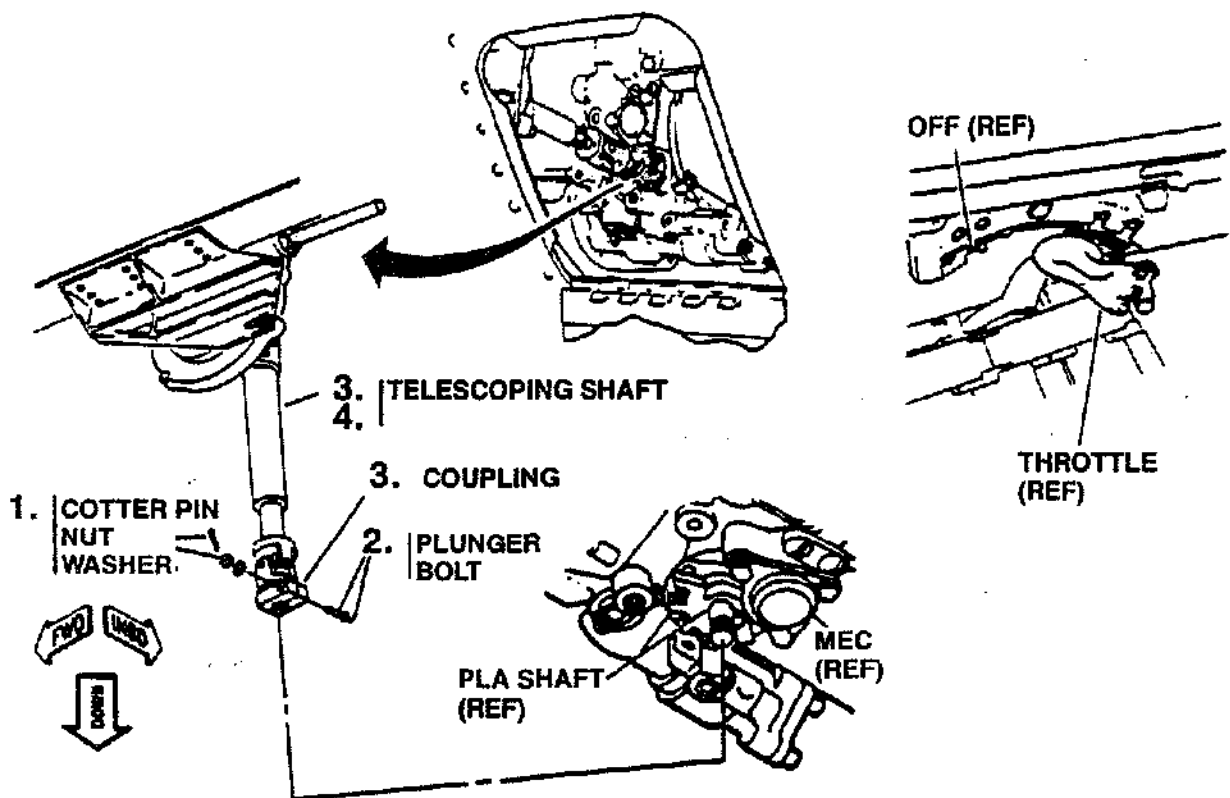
F-16C/D Cockpit Throttle Quadrant and Engine Bay Throttle Shaft
